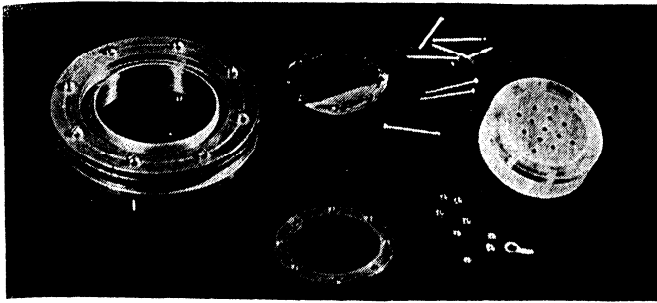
A dismantled capsule with a discarded diaphragm. Assembly on left is diaphragm mounting jig.
